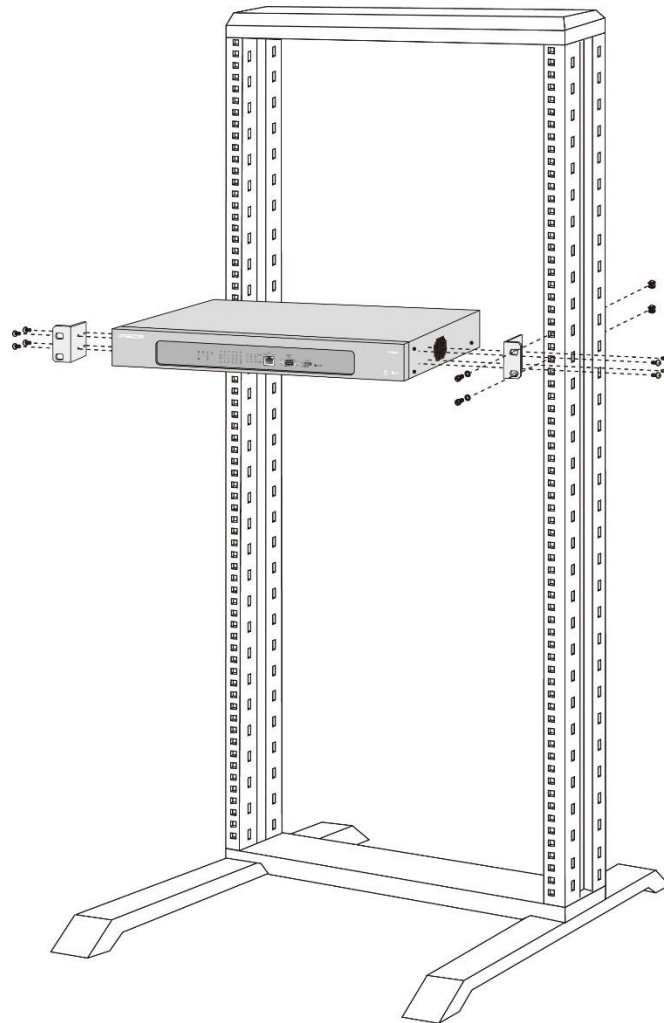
WTIM24 Rack Mounting Installation
